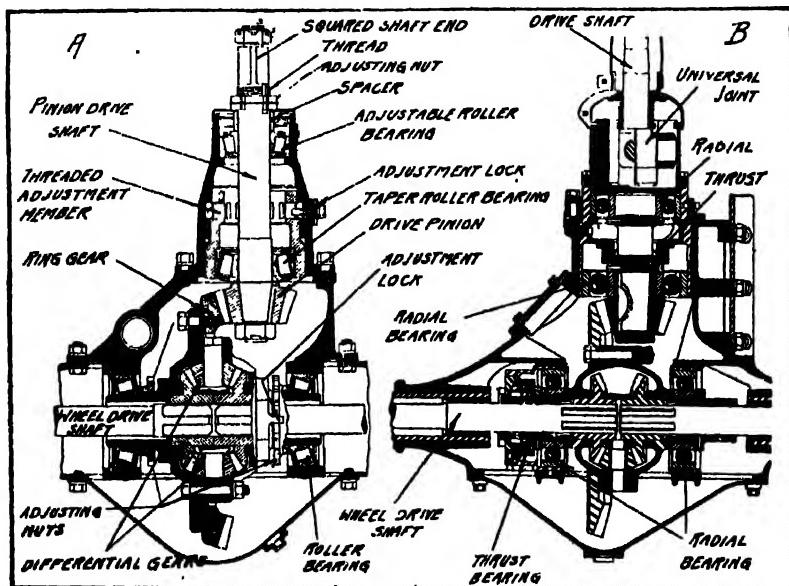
Sectional Diagrams of Bevel Drive Gears, Showing Method of Adjusting the Gearing.
